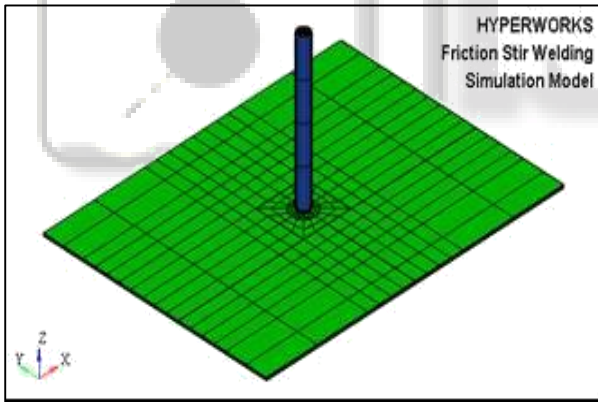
Isometric view of finite element model of friction stir welding process showing tool and workpiece.
